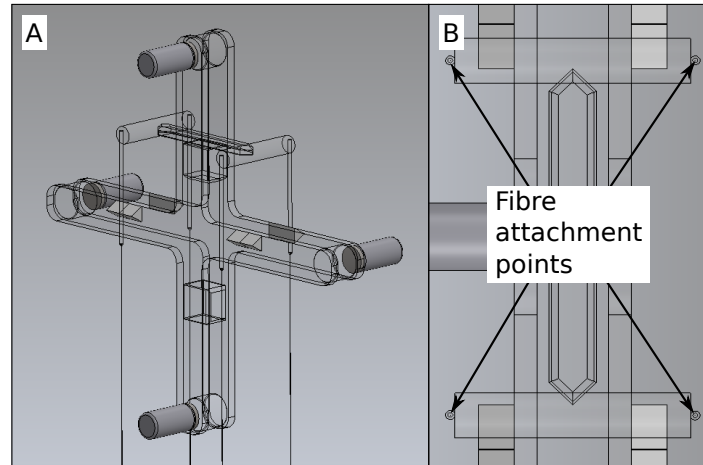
Image A shows a possible 4-fibre configuration in which the fibres are welded to an additional part which is welded to the cradle ear tip prior to the fibres. The fibres are 10 mm apart in this configuration. Image B depicts an isometric view of the penultimate mass in this configuration.
